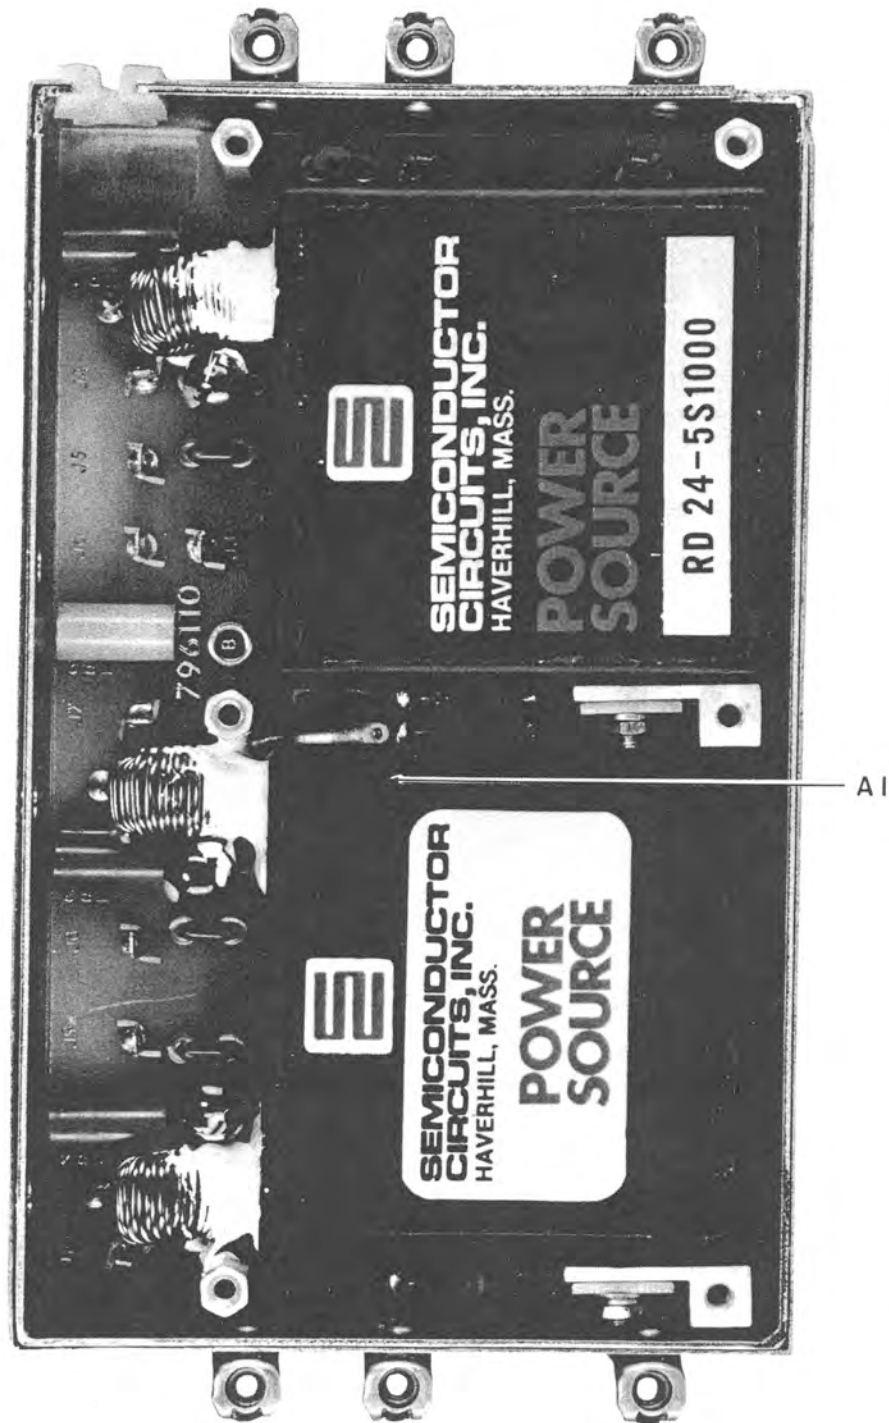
Type 796139 Power Supply Assembly (A10),
